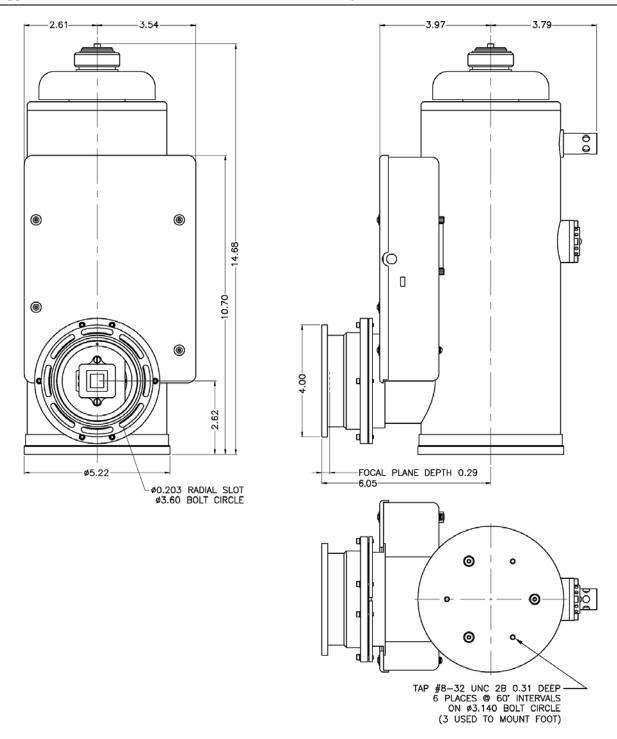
PI-SX LN-Cooled Camera (4.00" VON Flange)
